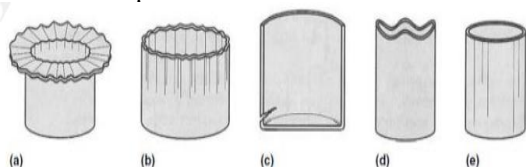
Defects in deep-drawn cylindrical cups. (a) Flange wrinkling. (b) Wall wrinkling. (c) Tearing. (d) Earing. (e) Surface scratches
